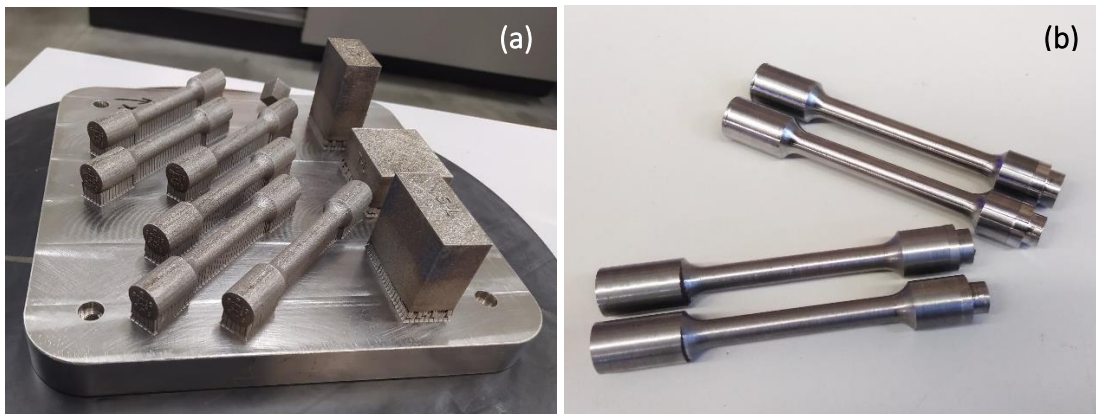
Building platform containing tensile horizontal specimens (a) and view of machined specimens (b)
